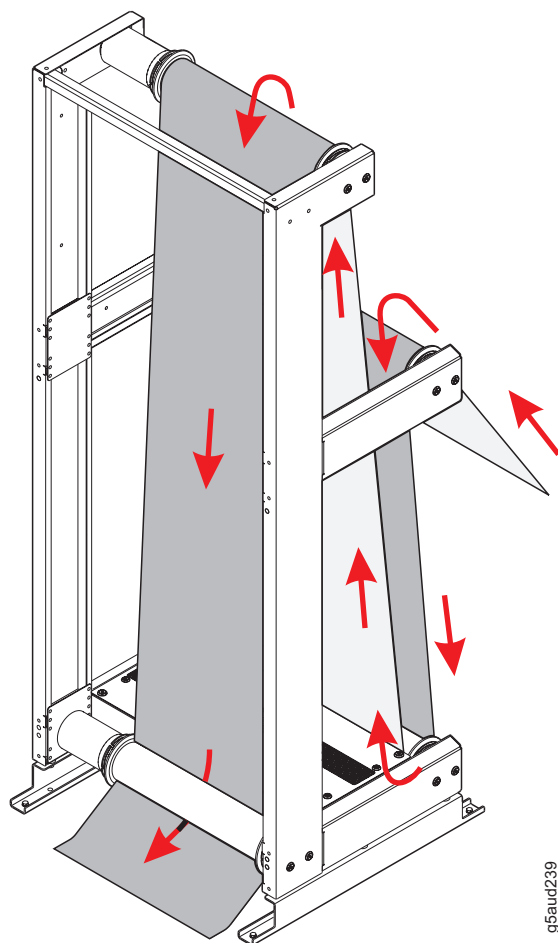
Threading the Vacuum Unit and the Cooling Tower
